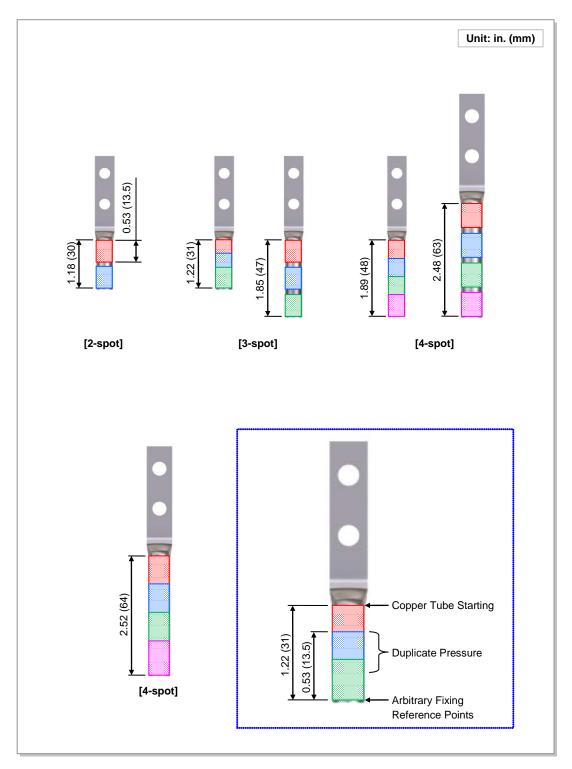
Pressure Reference Drawing (Hydraulic Press)
